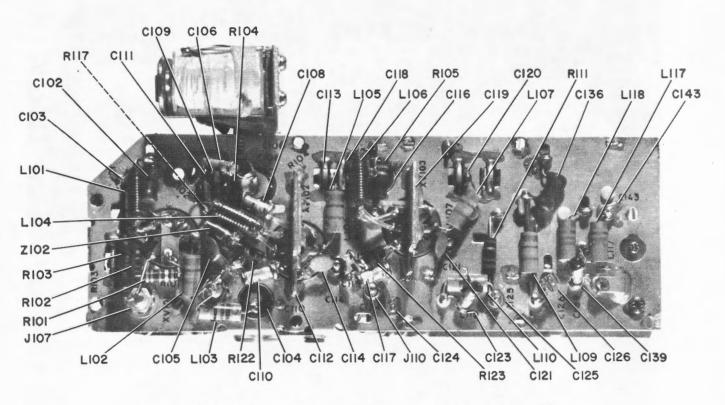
RF and PA Amplifier Assembly, Bottom View
